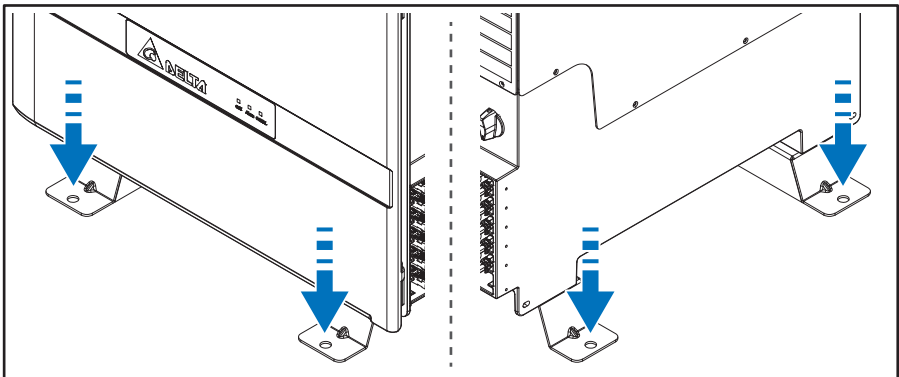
To secure inverter grounded brackets to ground-mounting base
